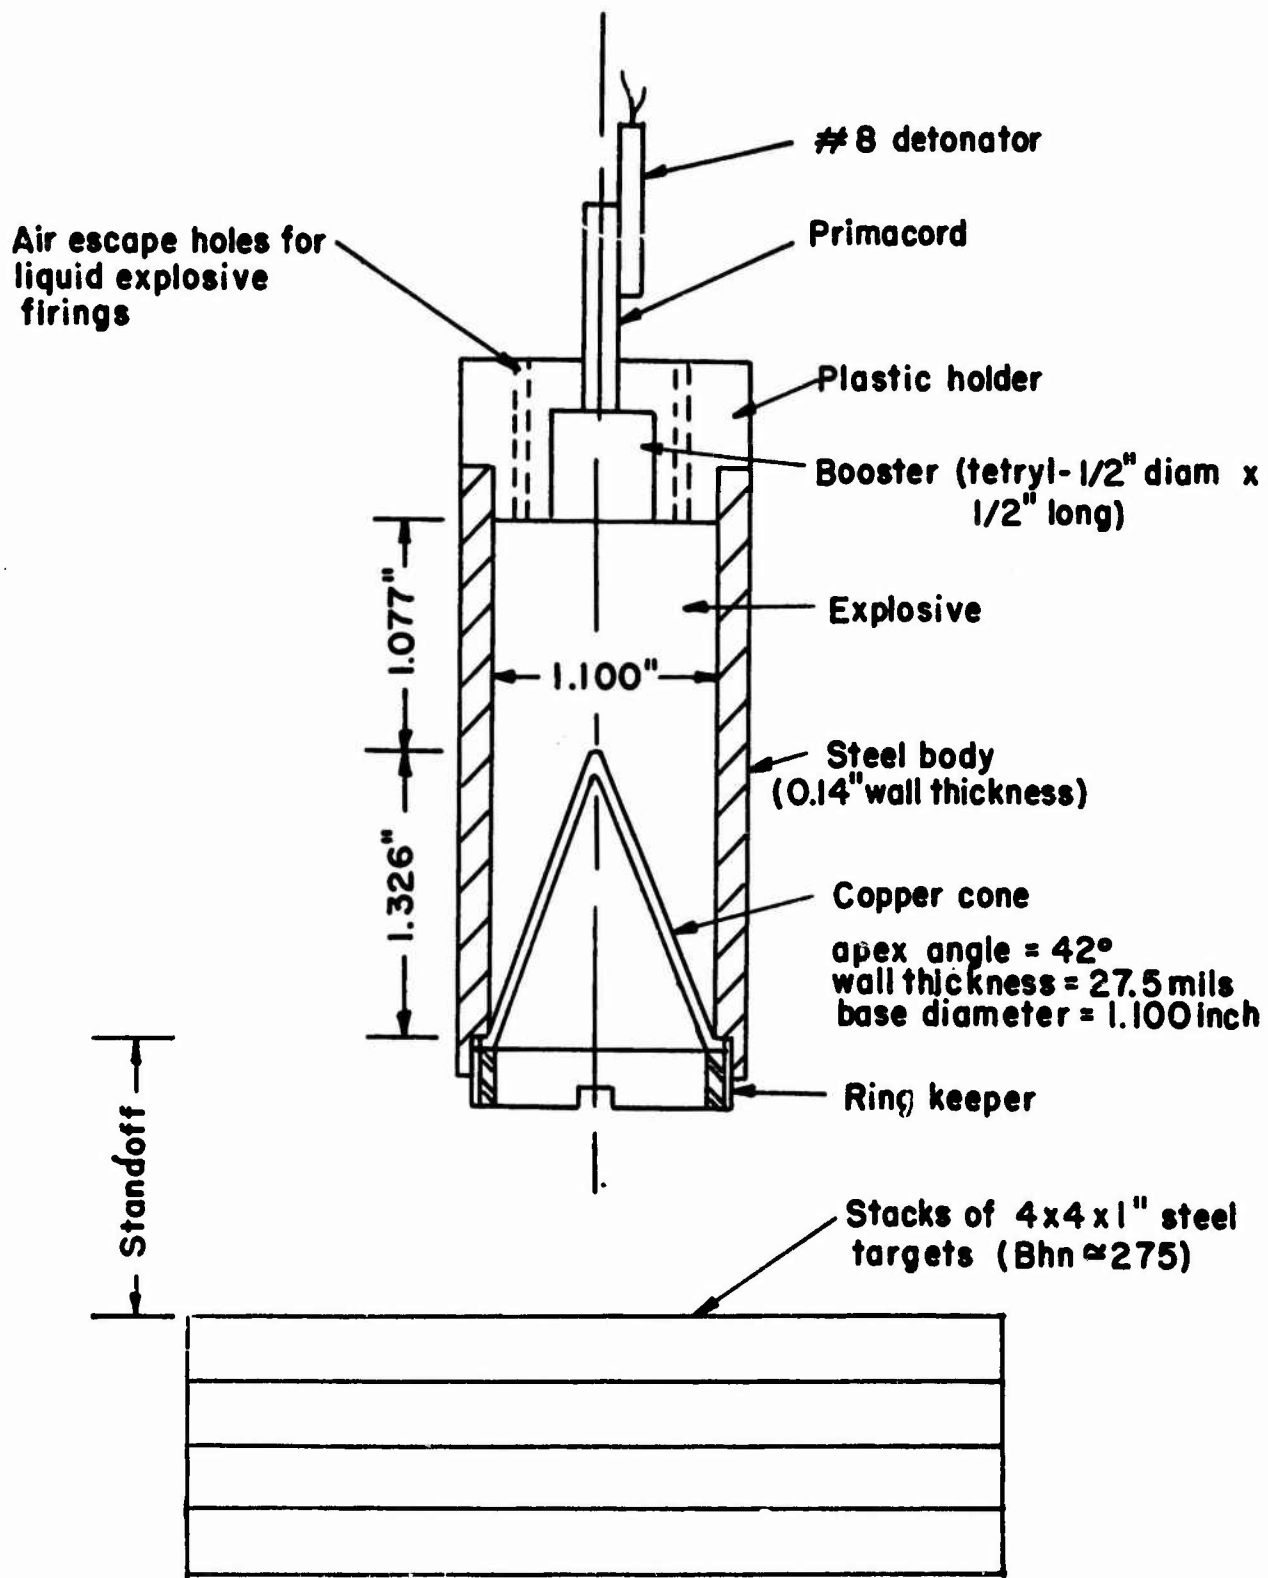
Sketch of charge assembly used in precision cone firings.
